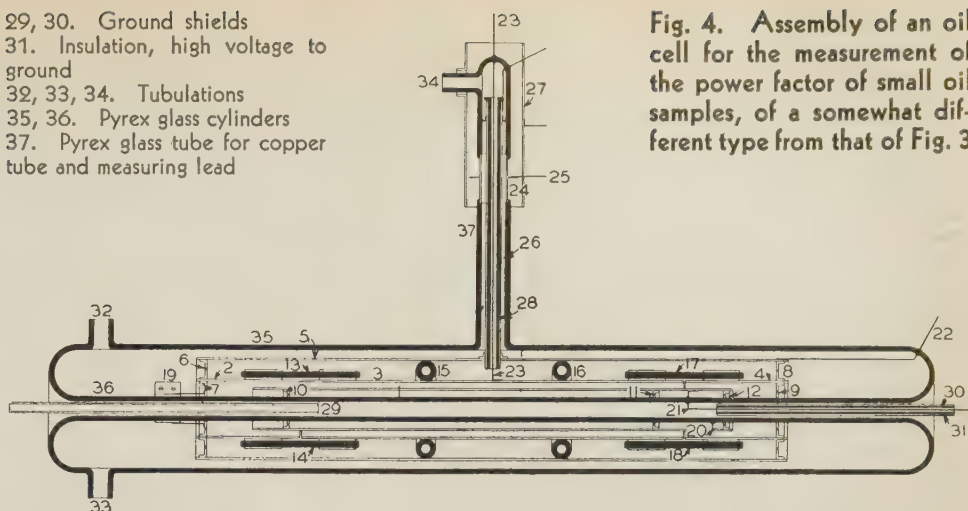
Assembly of an oil cell for the measurement of the power factor of small oil samples, of a somewhat different type from that of Fig. 3
